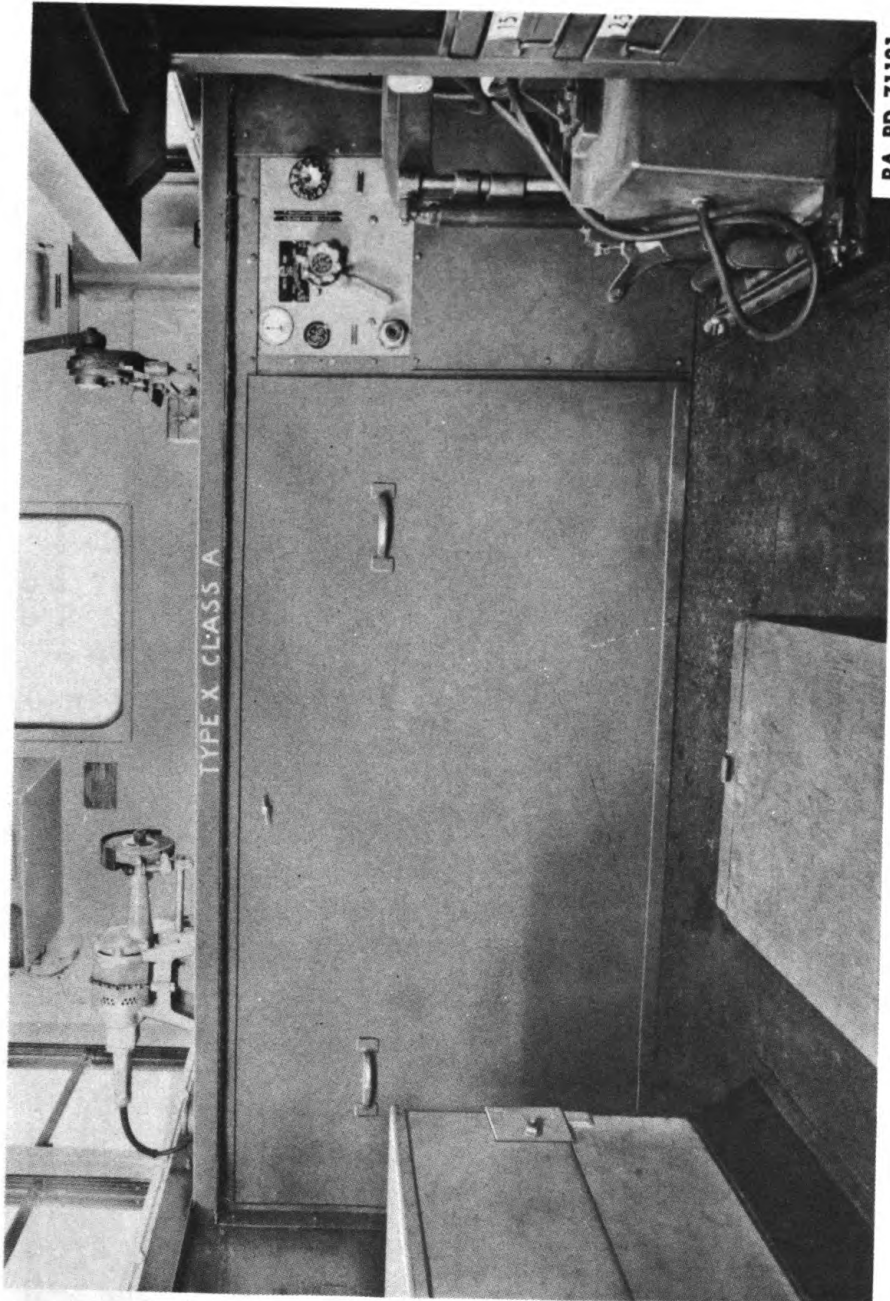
300-ampere Welding Generator and Controls – Welding Truck M12 – Cover Removed
